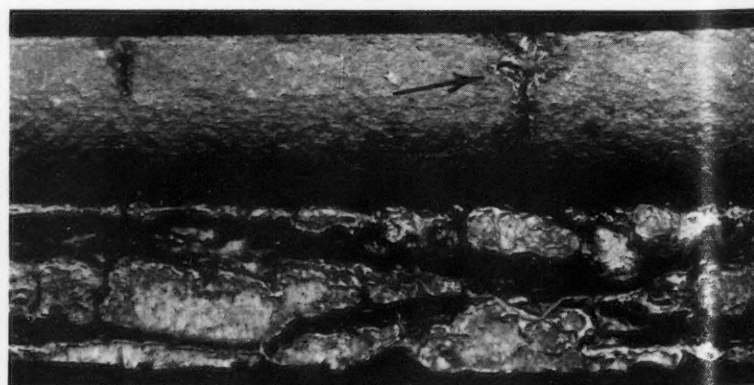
Edge view of stress corrosion at rolled edge. Arrow indicates expulsion of molten material. The rolled edge sample was spot welded to a sheared edge sample seen in lower half of field. 25X.
